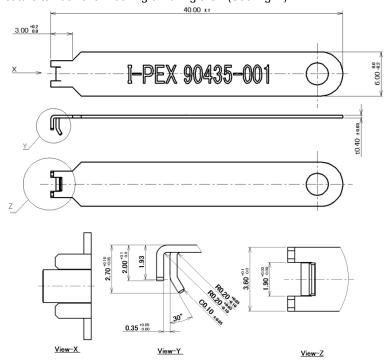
Recommendation: Pushing & Pulling JIG Part No. 90435-001
